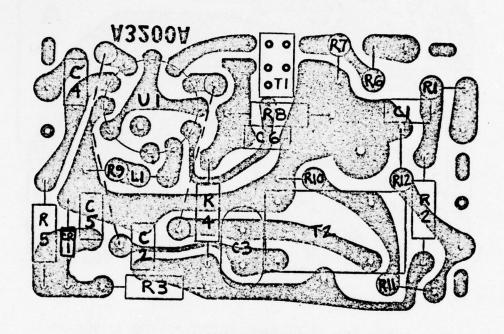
P.C. BOARD LAYOUT FOR THE A3200A CRS BALANCED MIXER ASSEMBLY
